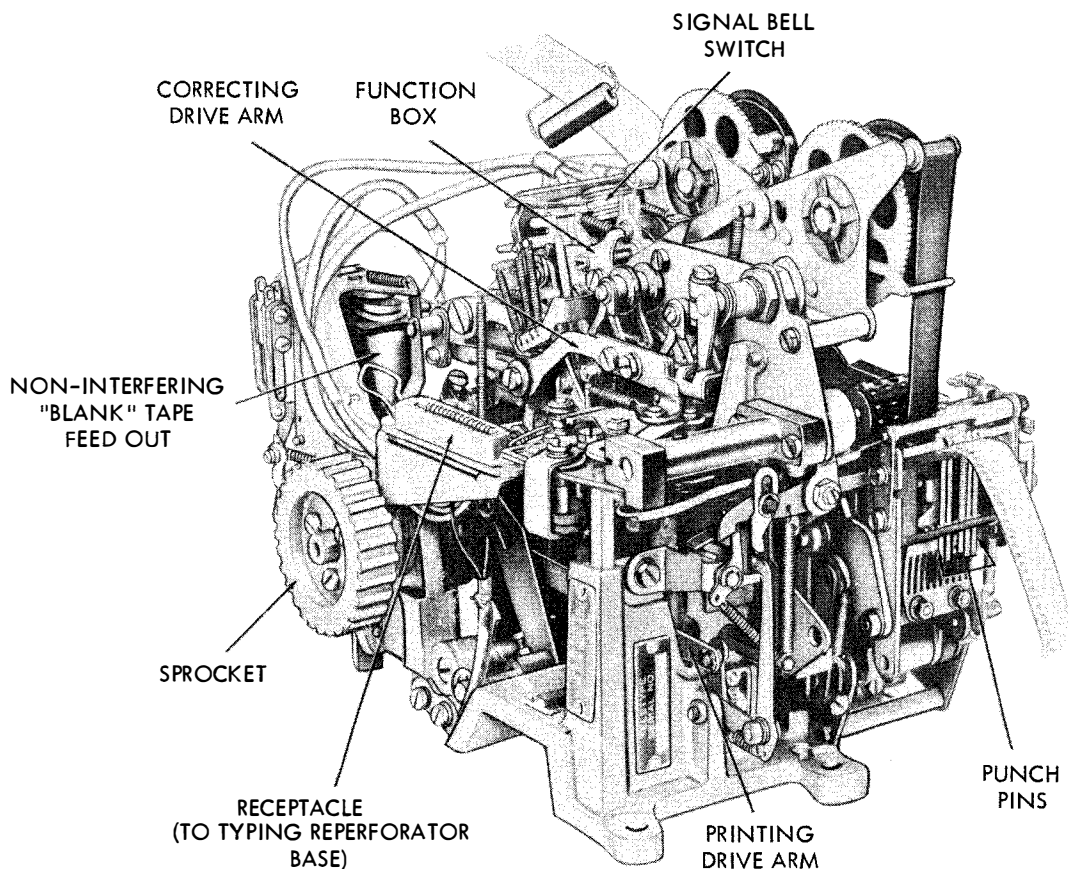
Typing Reperforator (Rear View, TT-192/UG and TT-274/UG)
